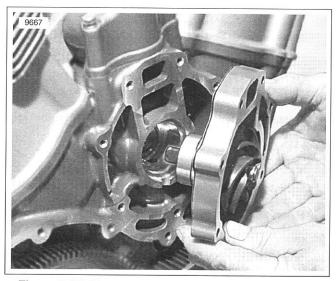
Water Pump Bearing Housing Assembly (clutch cover removed for clarity)
